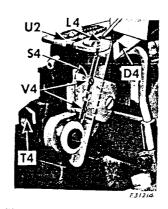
(Machine 246K61) Removal and Replacement of Stationary Knife
